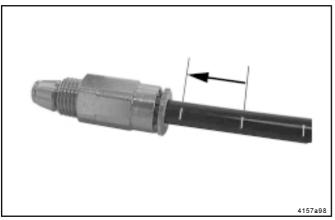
Check valve wirh knurled collar and pressure plastic tube
